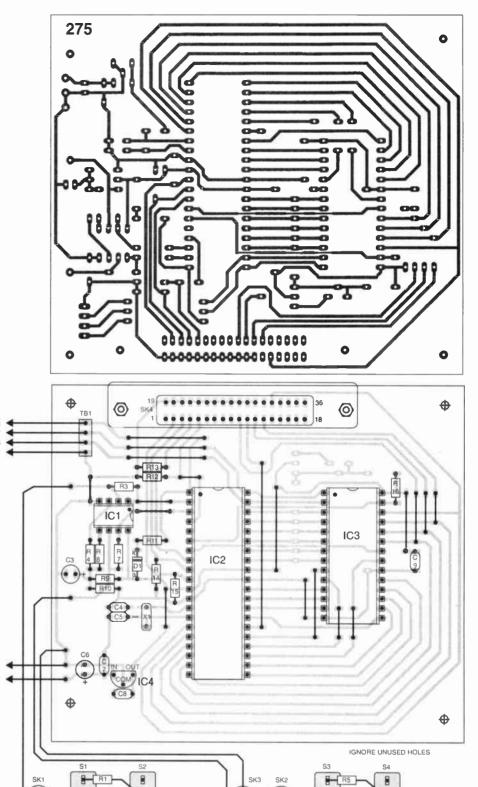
Printed circuit board full size copper foil master pattern and component layout. Ignore unused holes (see text).
